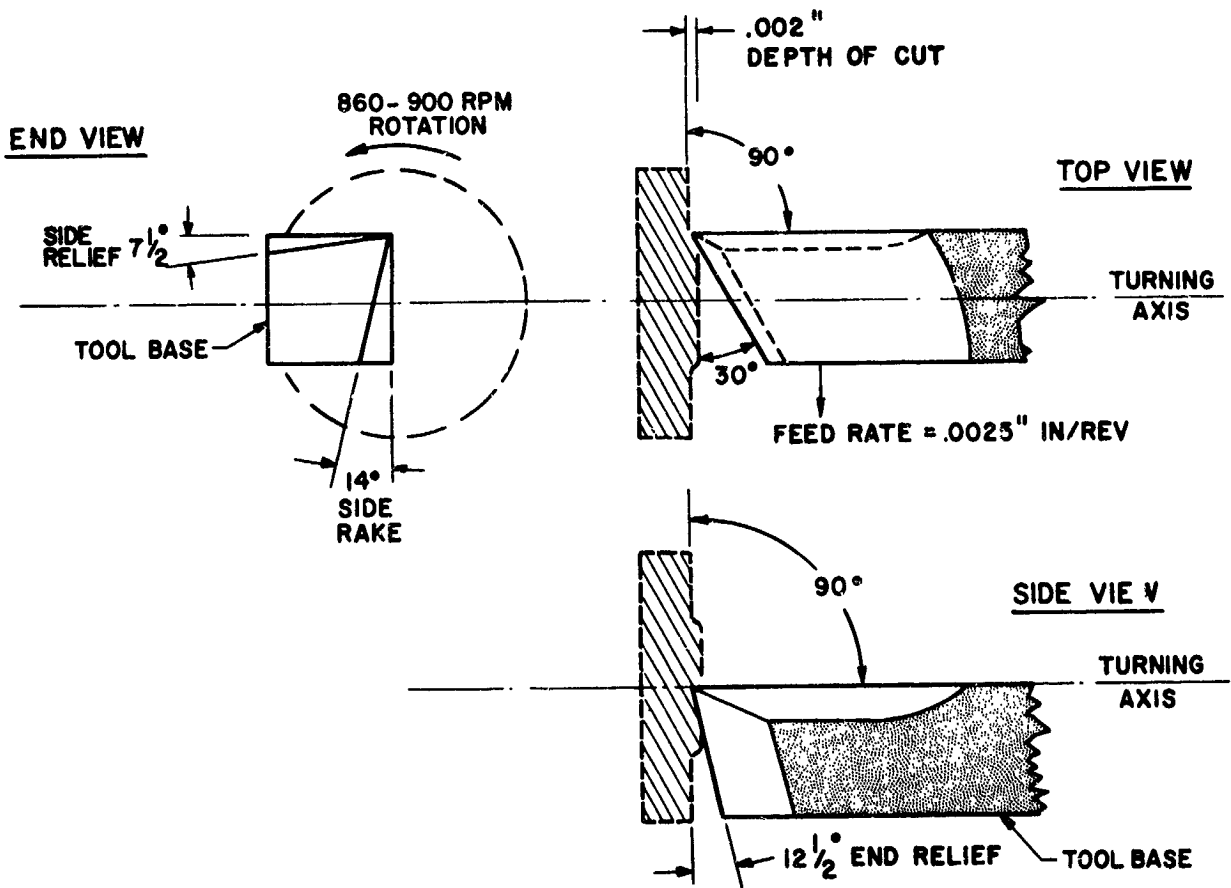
LATHE TOOL CONFIGURATION AND ORIENTATION WITH RESPECT TO FACE OF IONIZER BUTTONS (HIGH-SPEED STEEL VASCO HYPERCUT TOOL)
